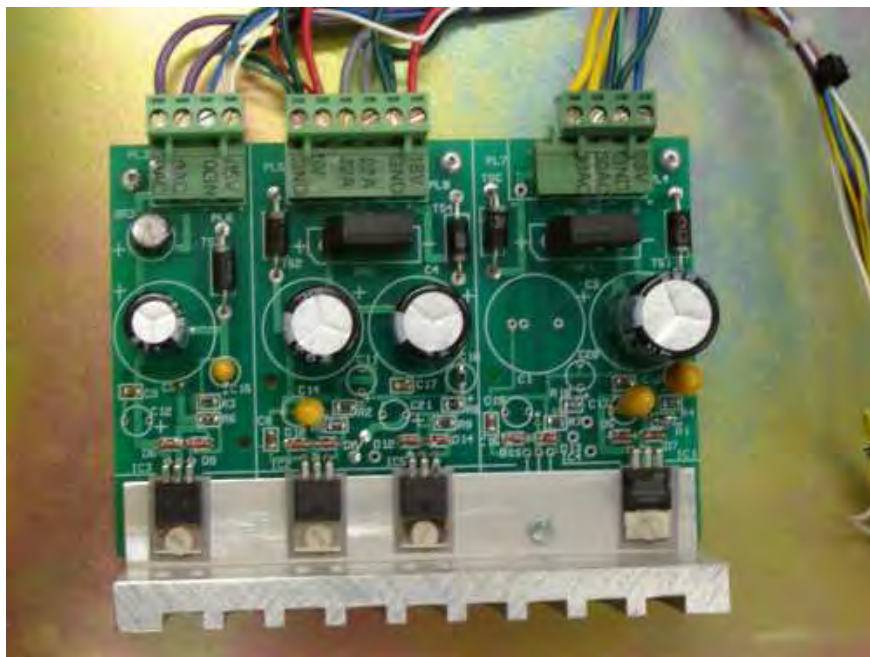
Photograph of the Power Supply Unit PCB (in the Electronics Control Box). Note that the H-bridge section of the PCB used in the prototype system has been removed from the PCB in the final production system.
